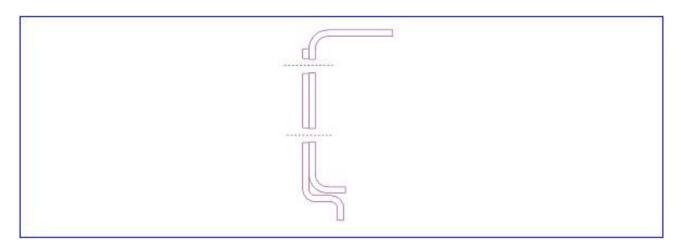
Left Side Rear Bumper Mounting Bracket Cross-Section
